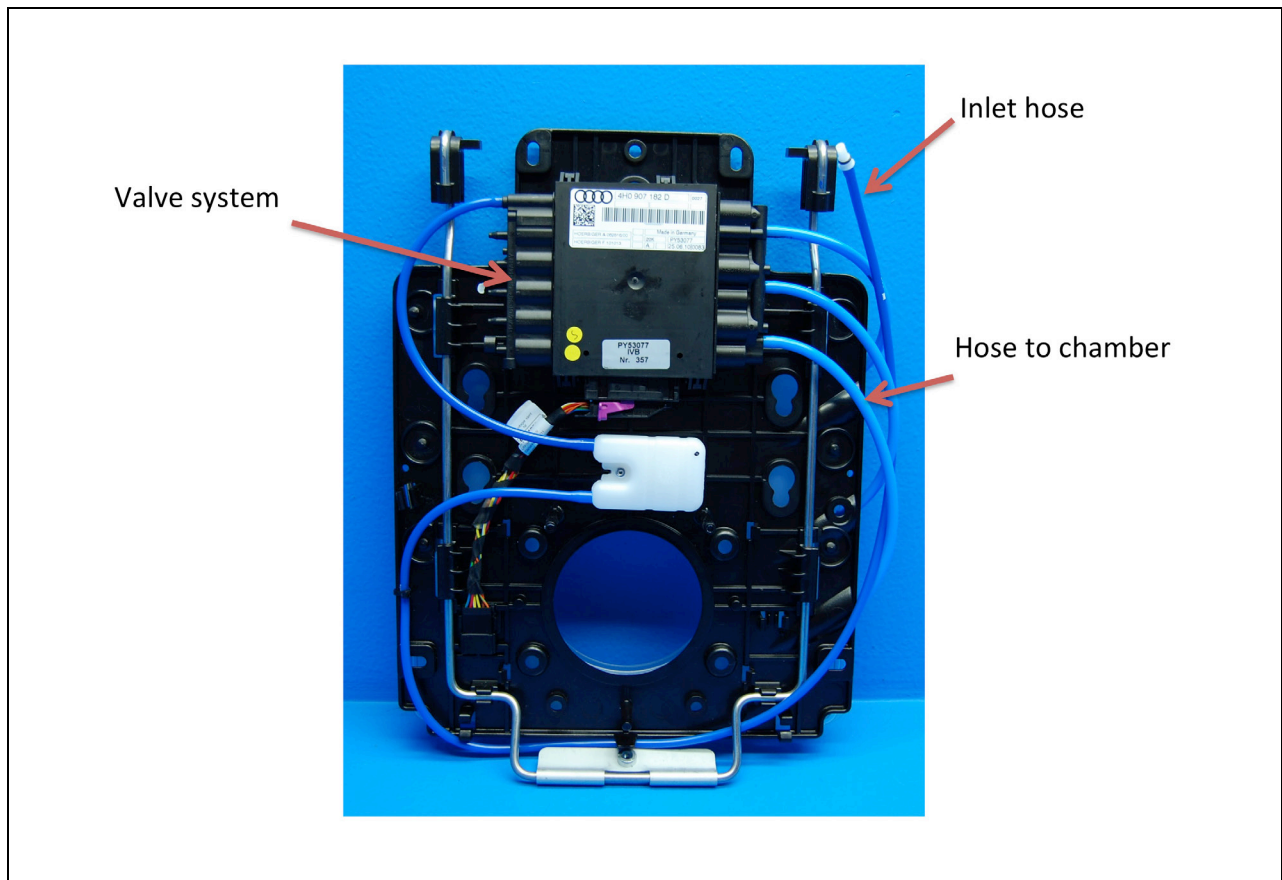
Air chamber system, rear view (referring to an internal report of Magna)
